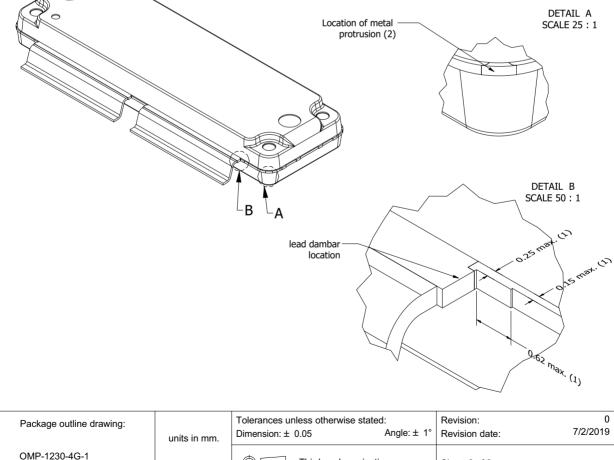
Package outline OMP-1230-4G-1 (sheet 2 of 2)
